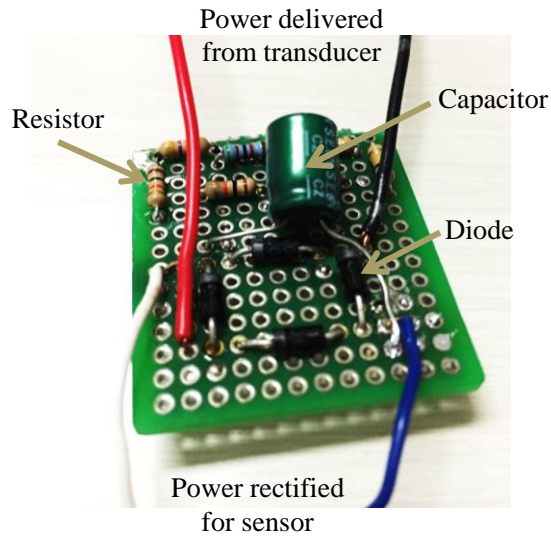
Welded rectifier circuit board powering stable direction-current voltage for sensors.
